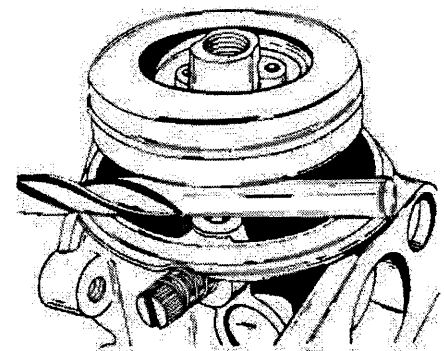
Float level should be checked by placing an appropriate size drill bit between float and carburetor body. Refer to text for proper size drill bit.
